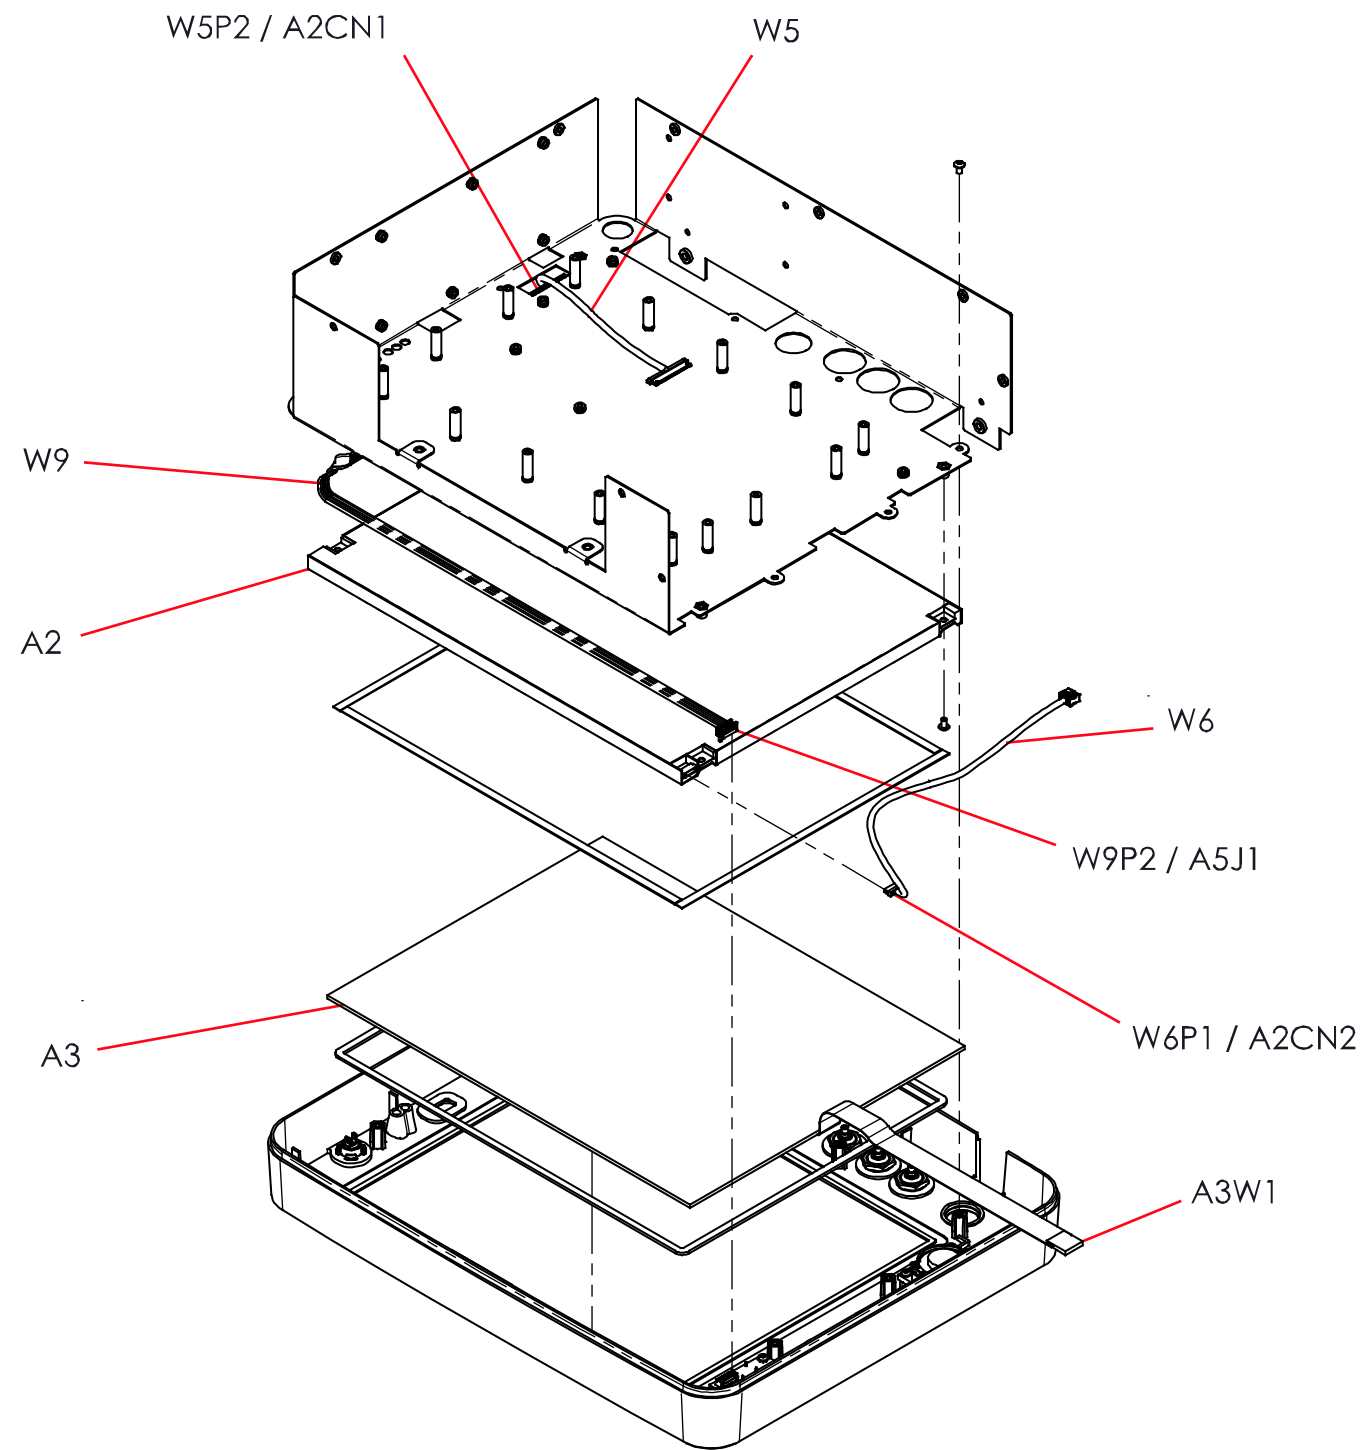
Front Chassis / Panel Assy (Sheet 3 of 6)
